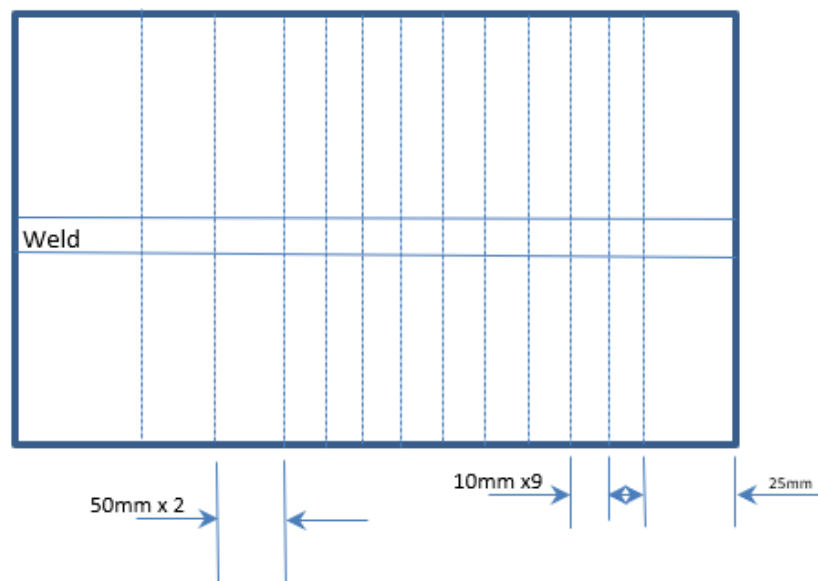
measurements of the sectioned welded samples for test samples .
